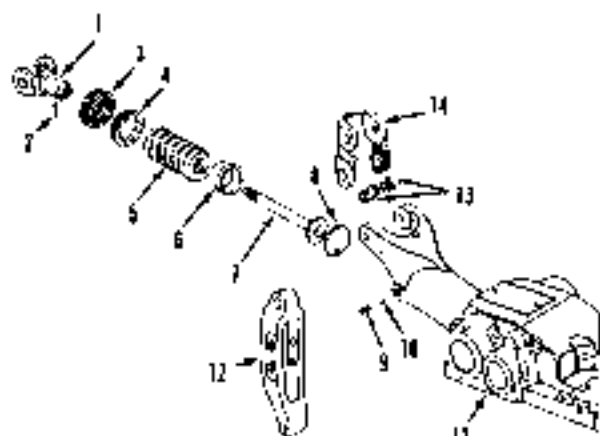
Refer to test for checking and adjusting transport stop. Pressure control model shown.
